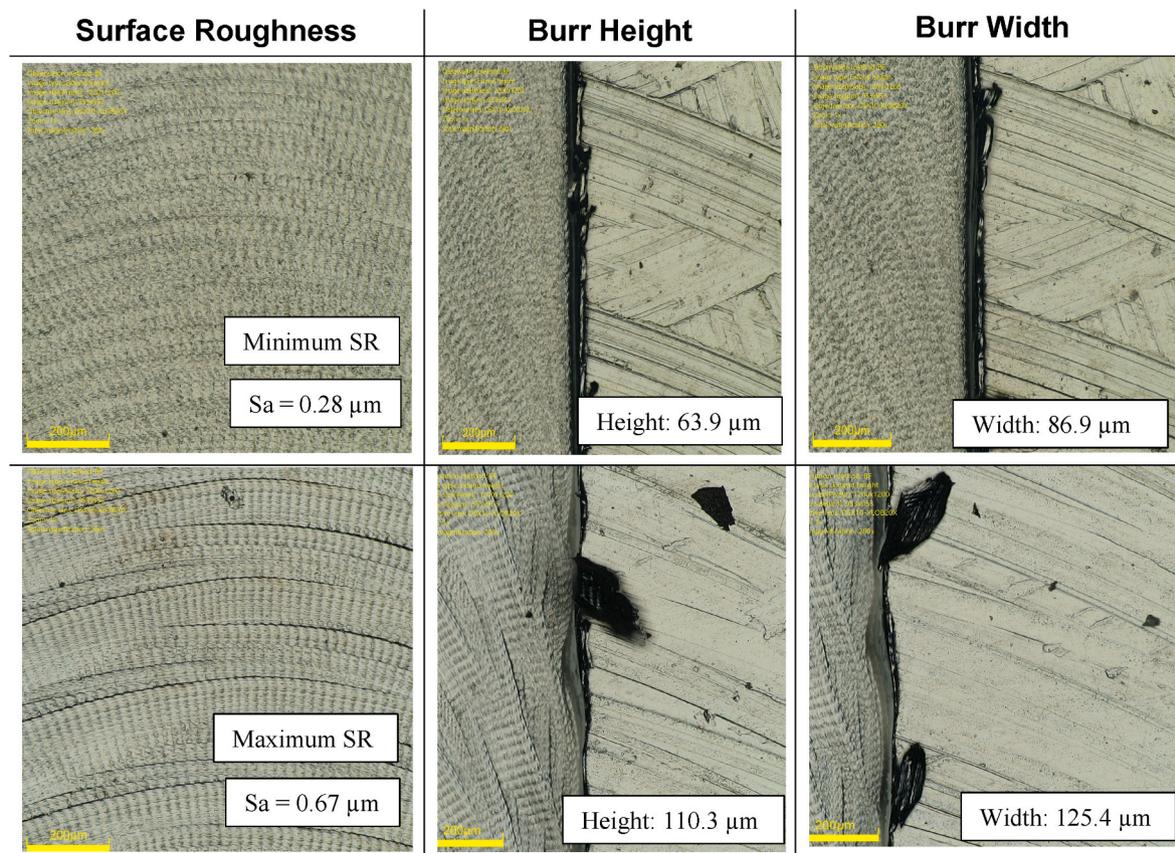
Burr height & burr width against minimum & maximum surface roughness.
